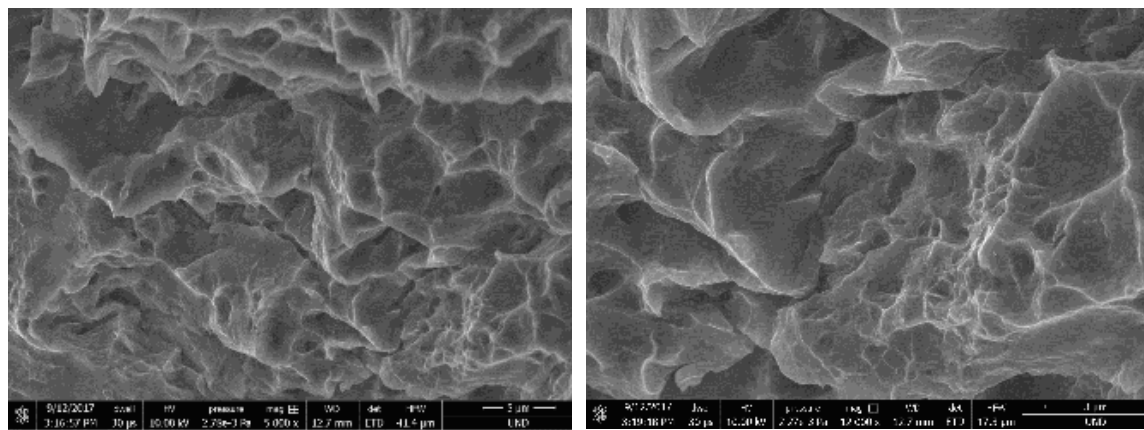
Features on the fracture surface confirming a mixture of brittle/ductile fracture (1530 RPM, and 48 mm/min).
